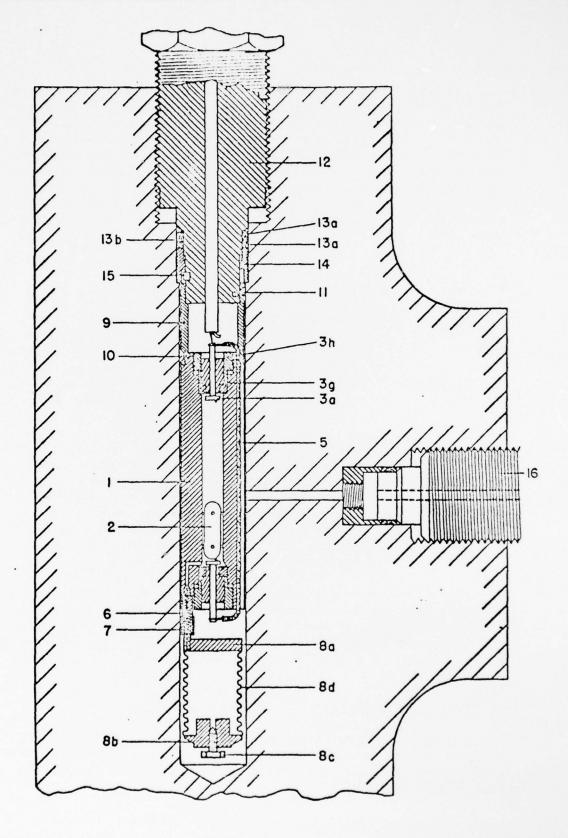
Cross Section of the Falling Weight Fixture in Place
